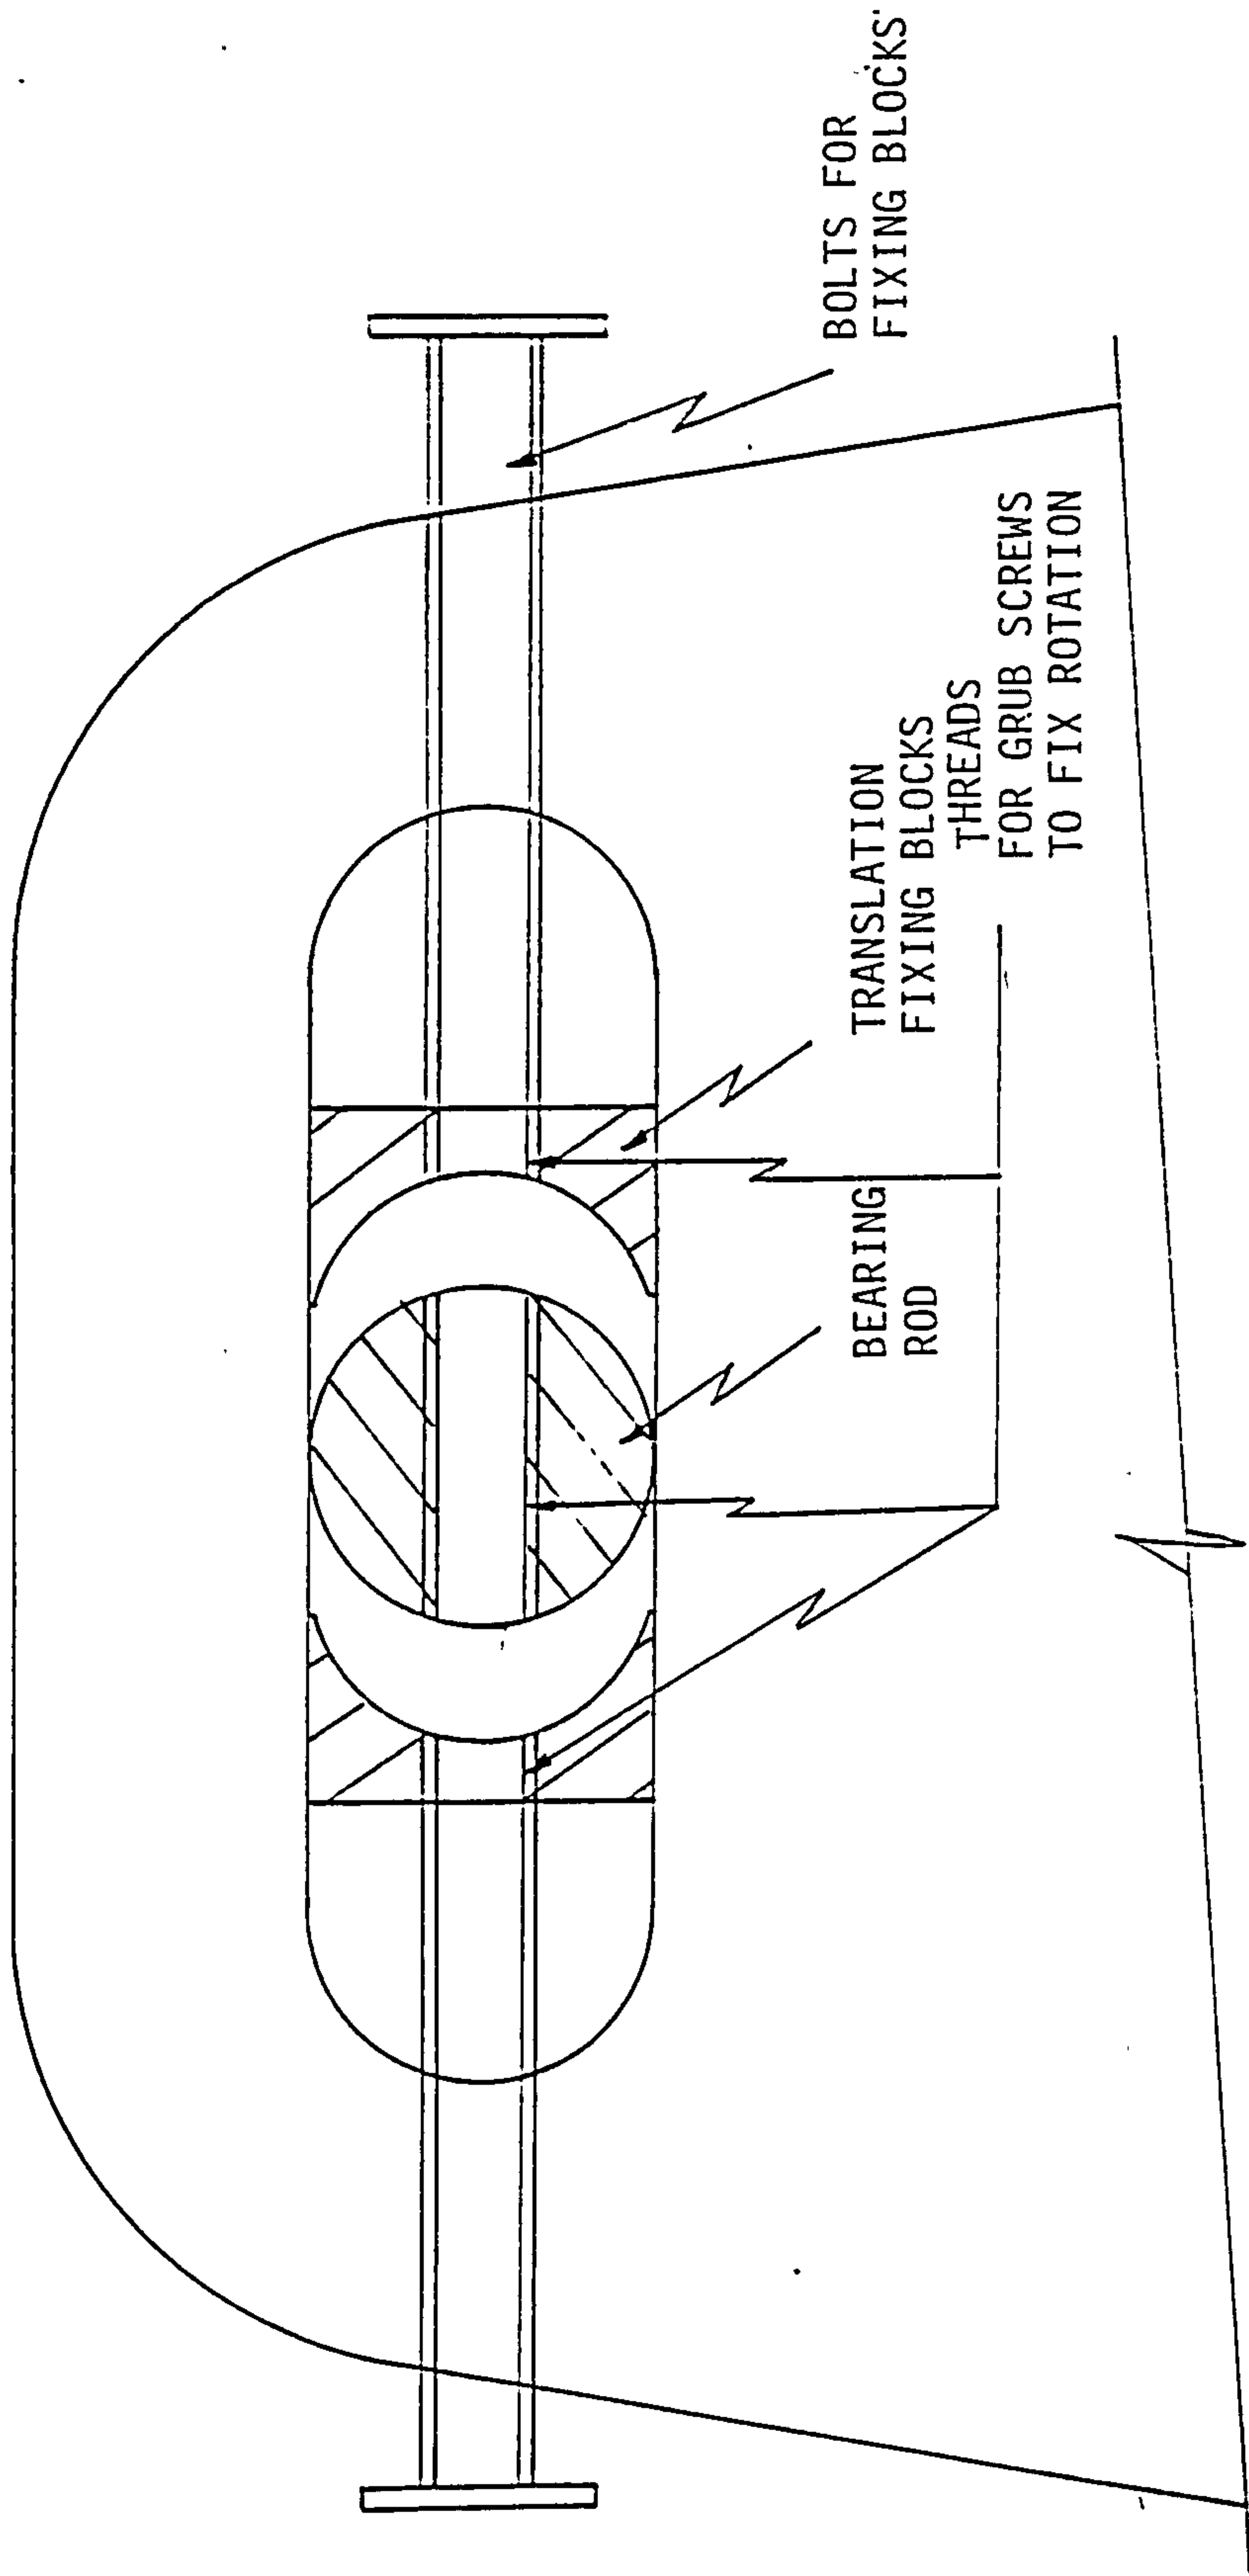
BEARING TYPE B SHOWING FIXING DEVICES
